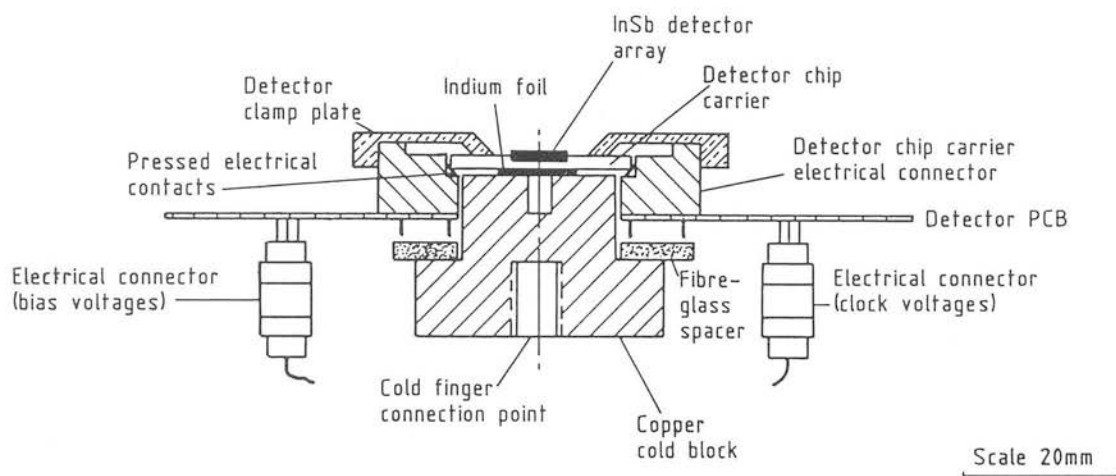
Detector array mount (SBRC design). The SBRC InSb array is mounted in a 68 pin leadless chip carrier, which is pressed into thermal contact with a copper cold sink, and into electrical contact with the detector PCB, by a clamp plate.
